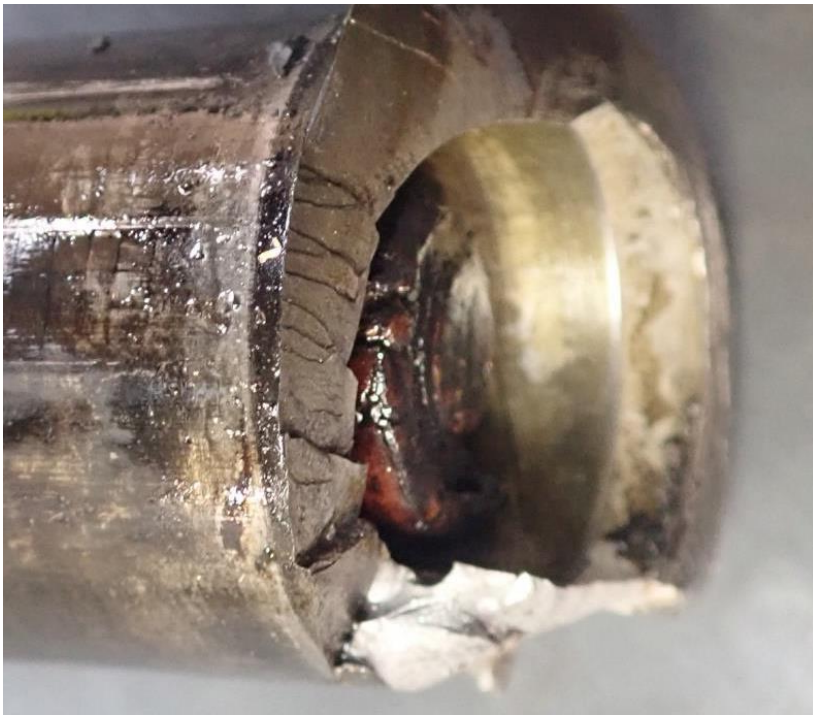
The fracture surface of the pinion showing the visible end of a wine cork. Photo: SEMTEC Laboratories
